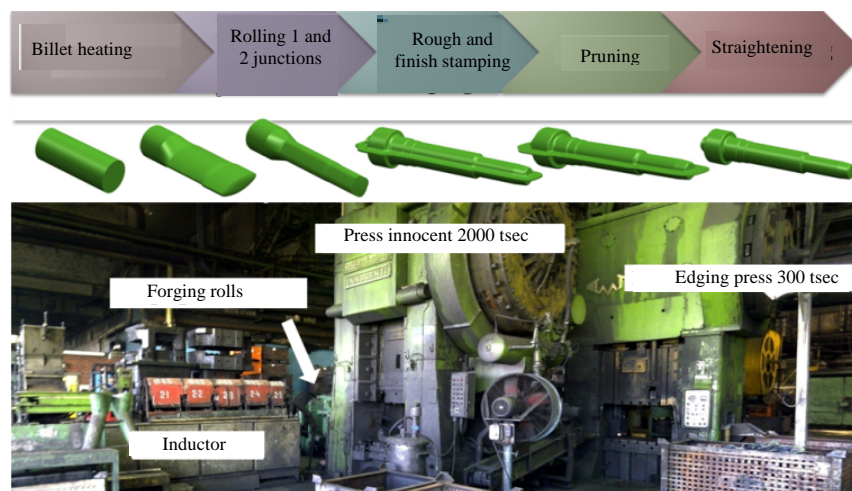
Part manufacturing “Secondary shaft” on universal equipment
